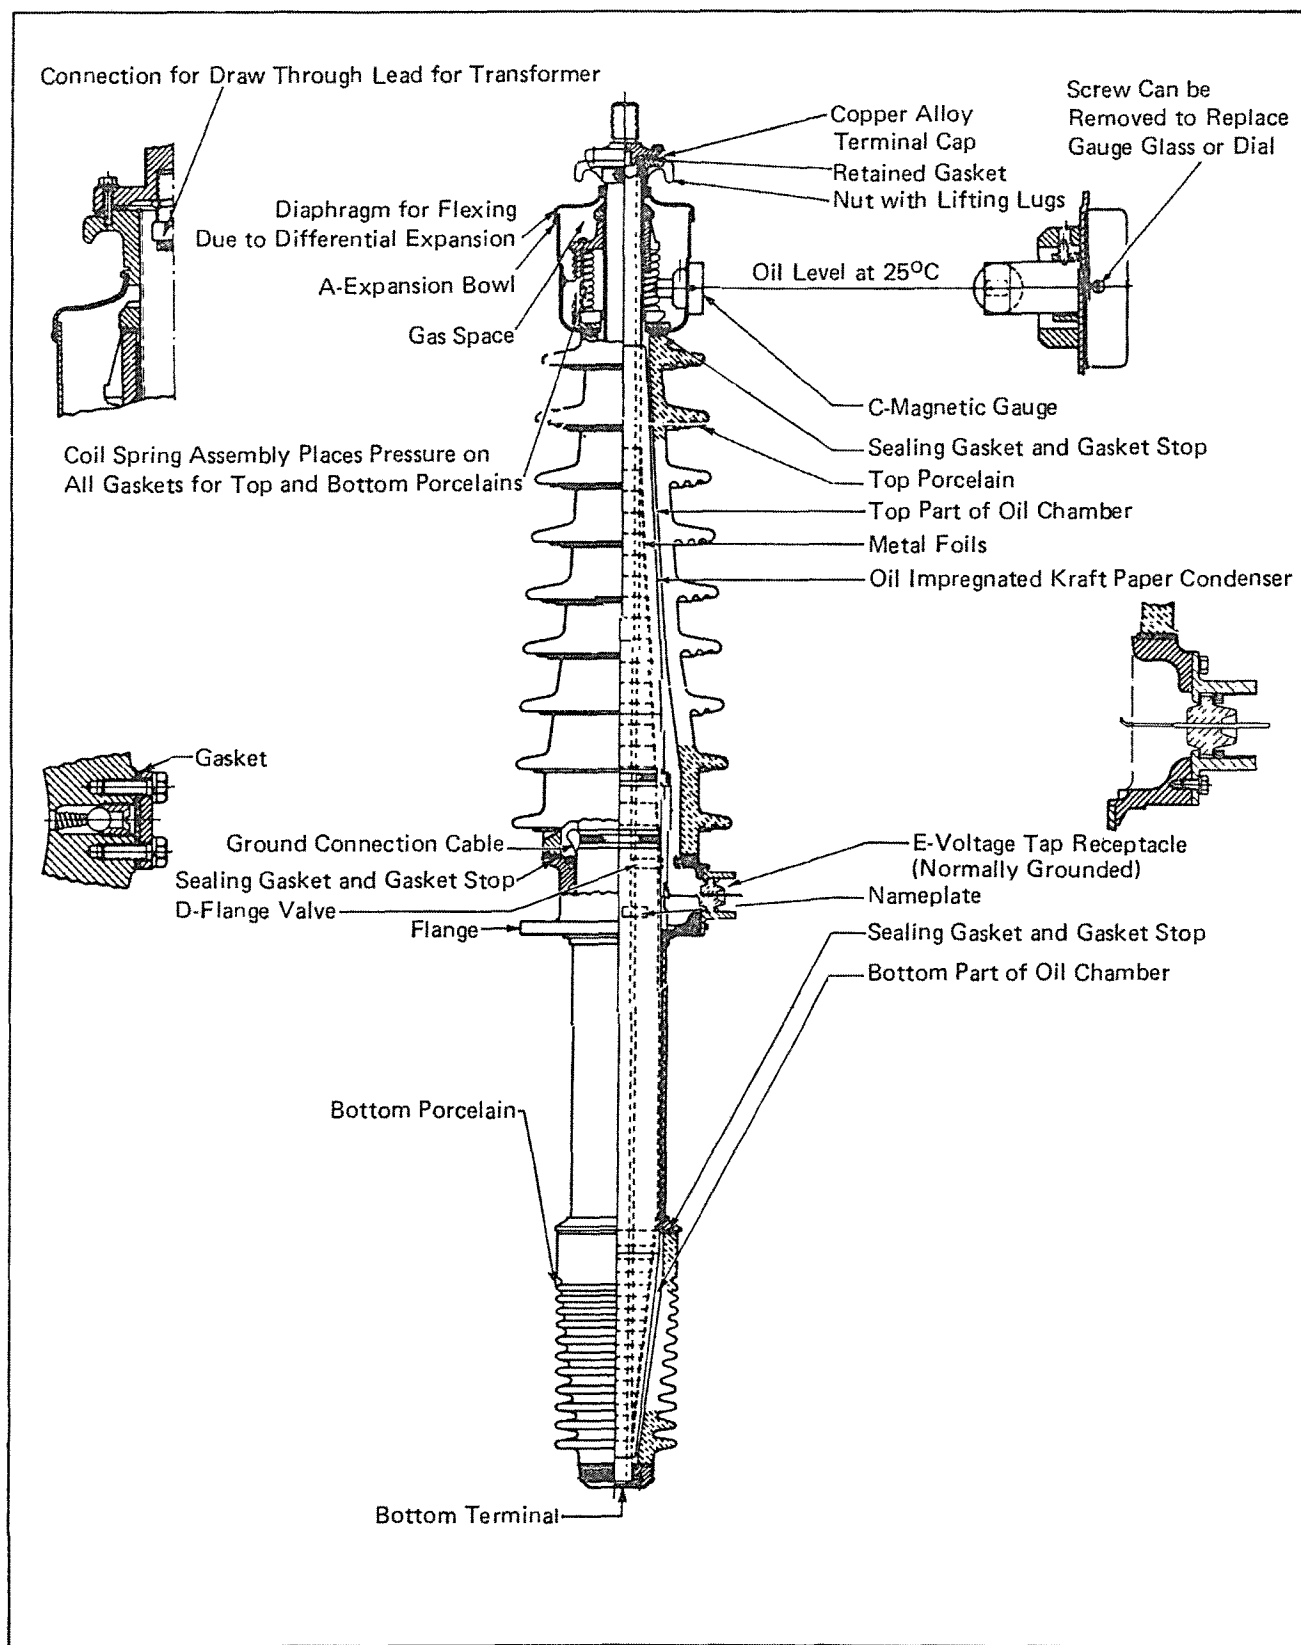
Sectional View—Aluminum Condenser Bushing, Type "O-AL"
